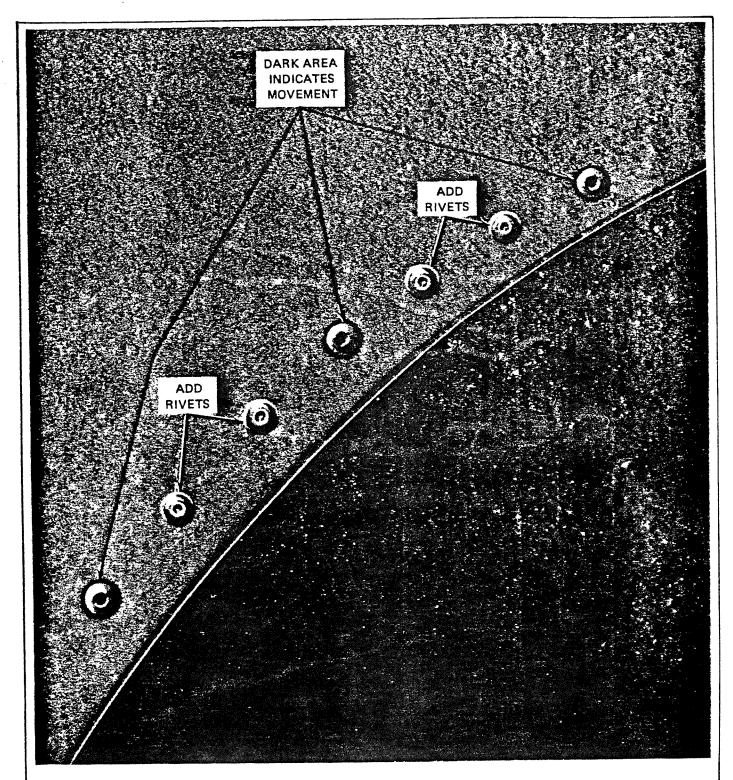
SHEAR PANEL TO WHEEL WELL CONNECTION.
